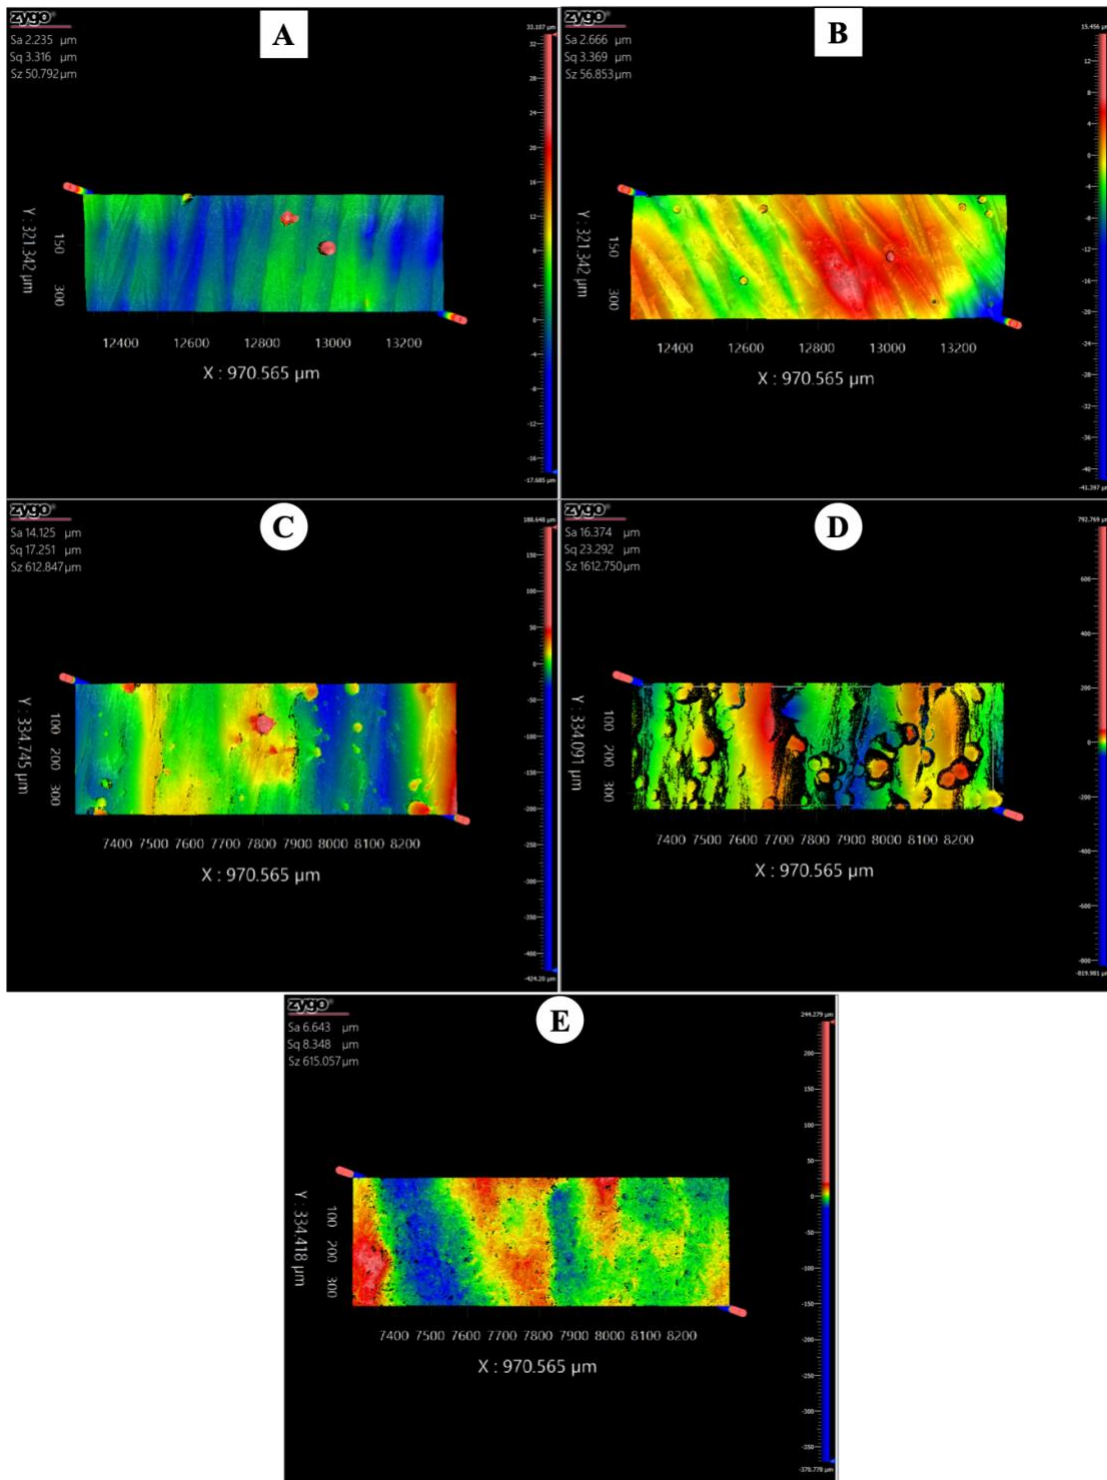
Flat surface (A) after 3D printing and (B) after PRC plating; dome surface (C) after 3D printing (D) after PRC plating and (E) after 3D printing, then bead blasting.
